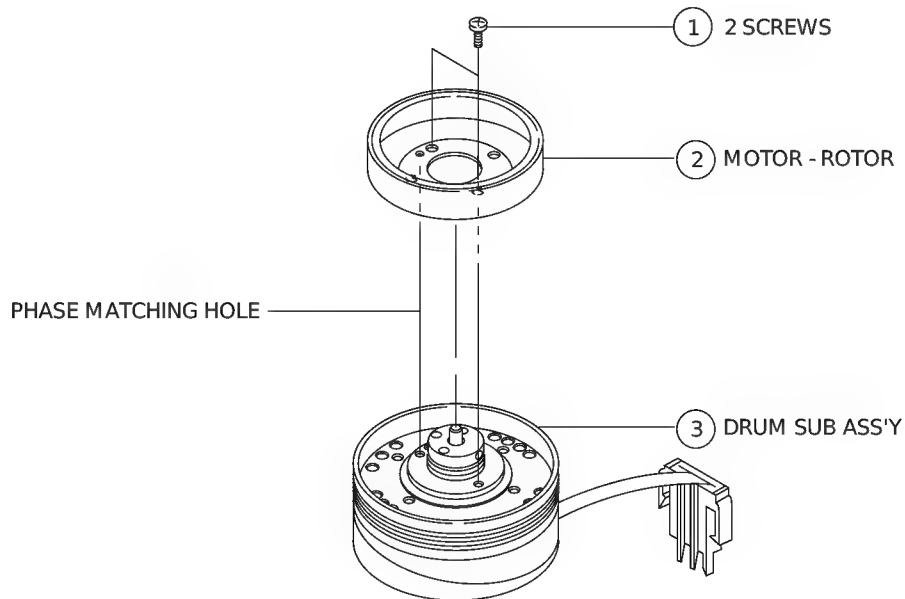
Assembly of Motor Rotor and Cylinder Sub Ass'y
